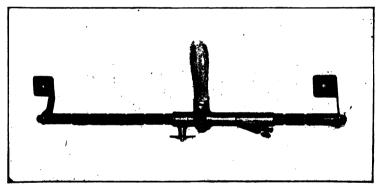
OPERATING HANDLE FOR MARK V BOMB RELEASE.
